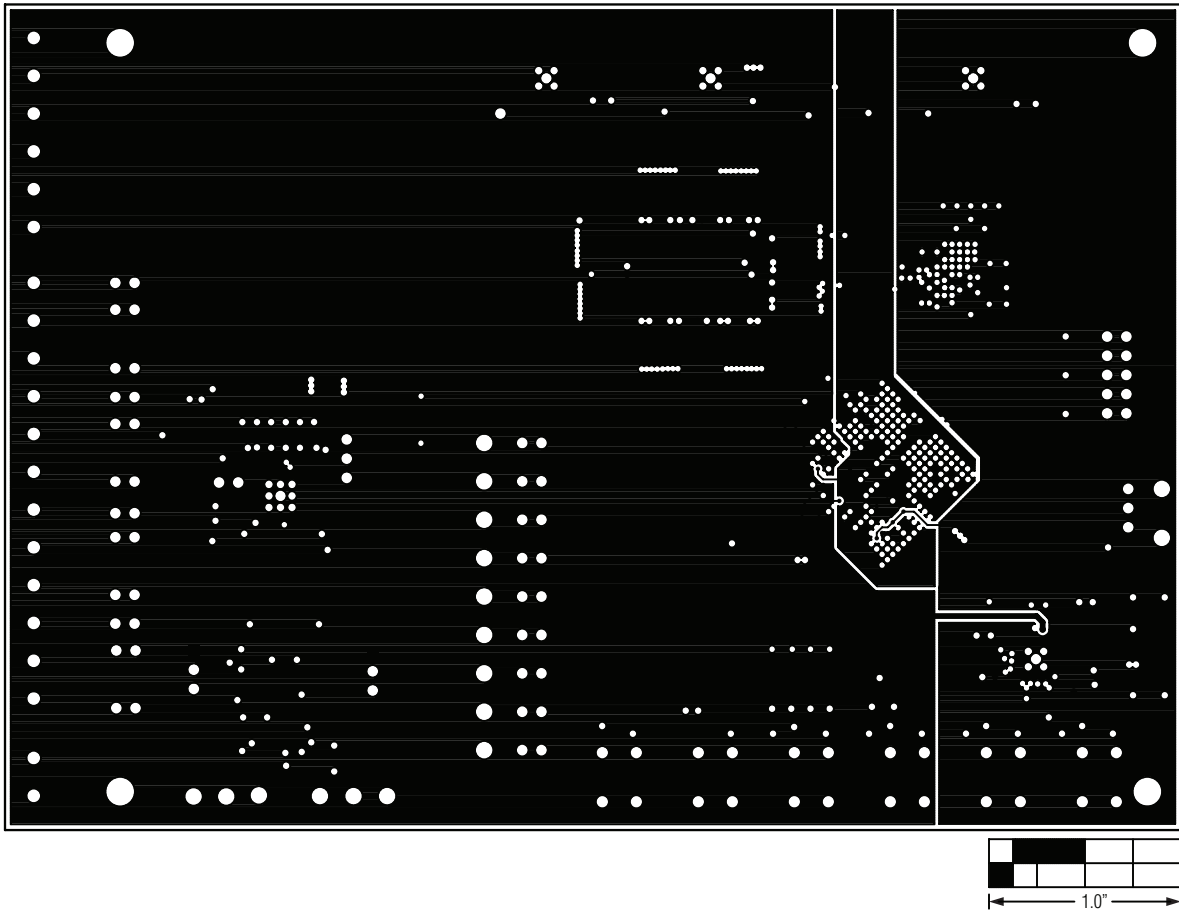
MAX11043 EV Kit PCB Layout—Signal Layer 6
